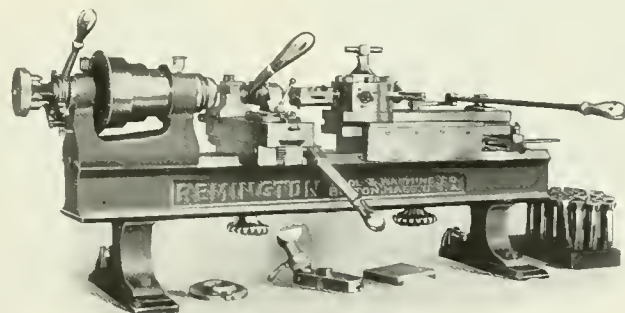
Bench Lathe arranged with Turret and Forming and Cutting-off Slide
